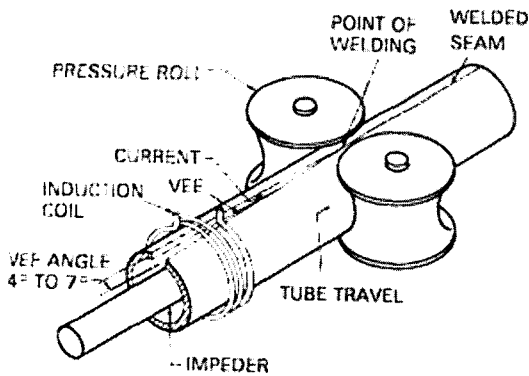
Schematic of high frequency induction welding process used in producing aluminium tube.
